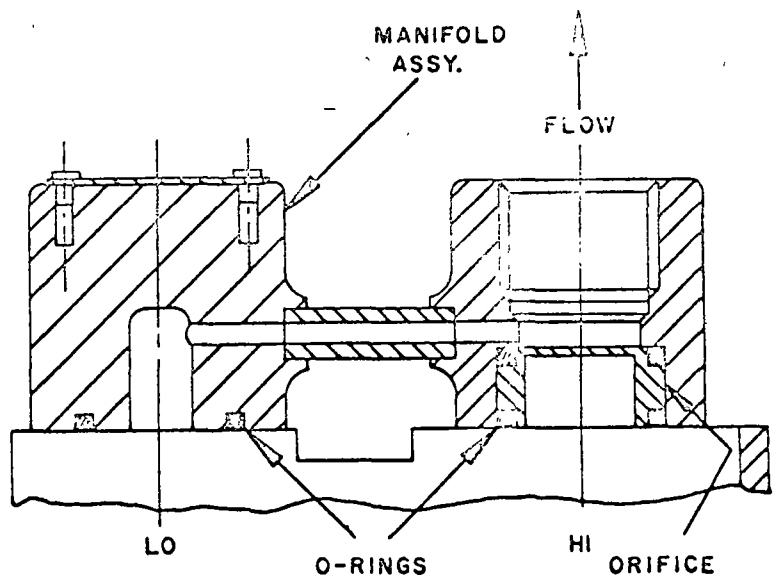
INTEGRAL ORIFICE ASSEMBLY
